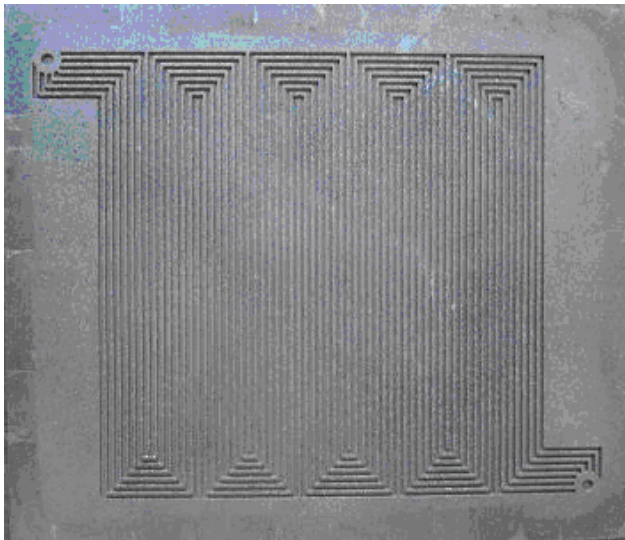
One side of a laminate polymer composite bipolar plate showing the 7-channel parallel serpentine style design. Plate dimensions are 12 x 14 cm. Channel dimensions are 0.8 x 0.8 mm.
